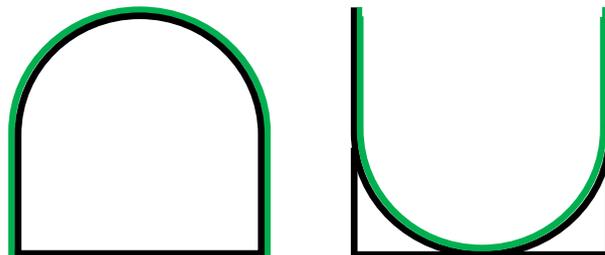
Left: he-mould, right she-mould. Black is the mould, green is the sandwich polymer structure.
